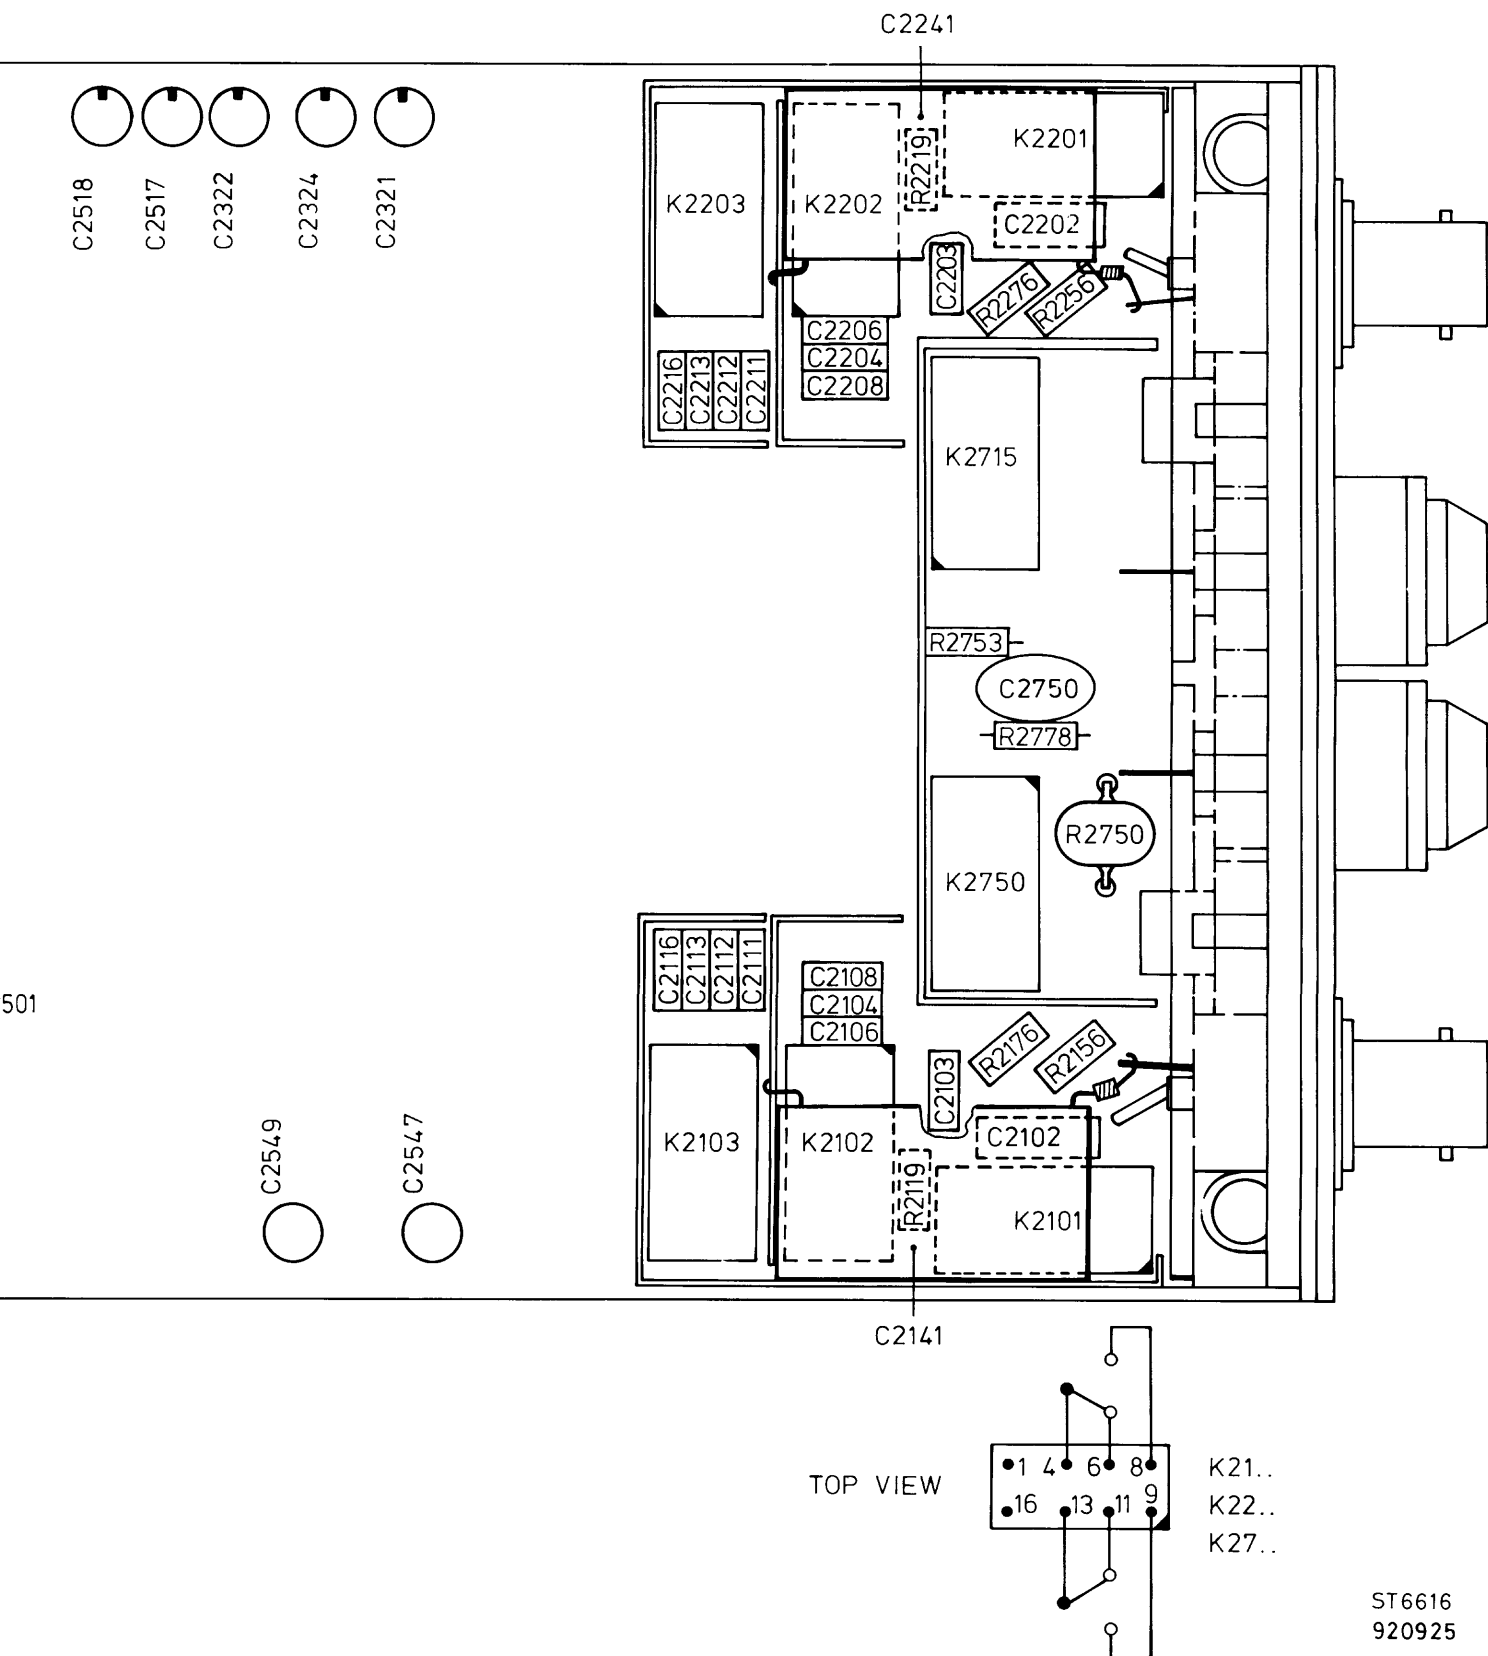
Analog A2 PCB assembly (Wired components side) for revision levels 22 and higher. See Figure 10.4b for revision level 21 and lower
